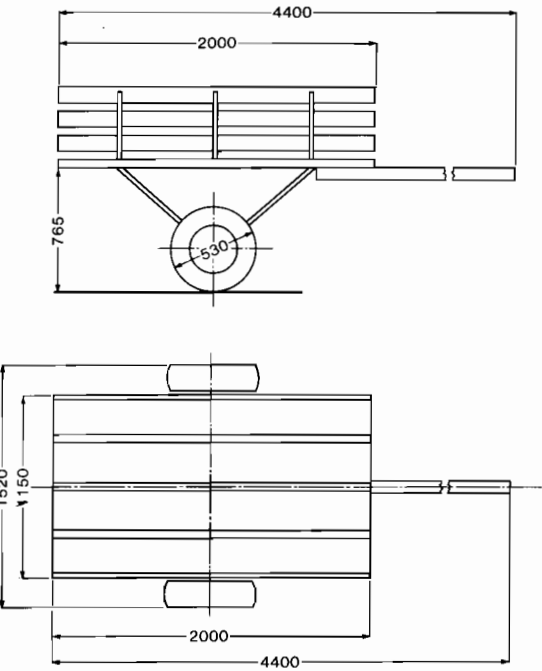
Principal dimensions (in millimetres) of experimental cart.
